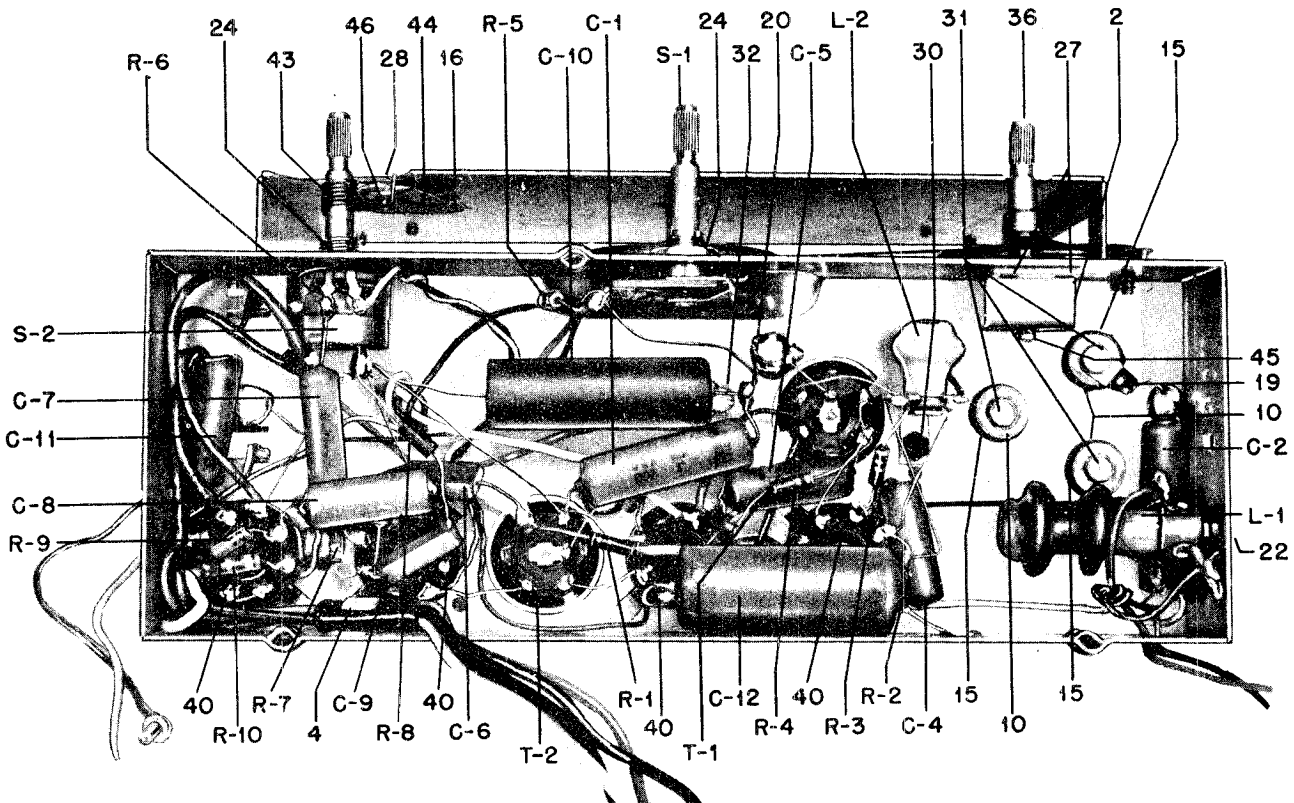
PARTS LOCATION - CHASSIS BOTTOM
